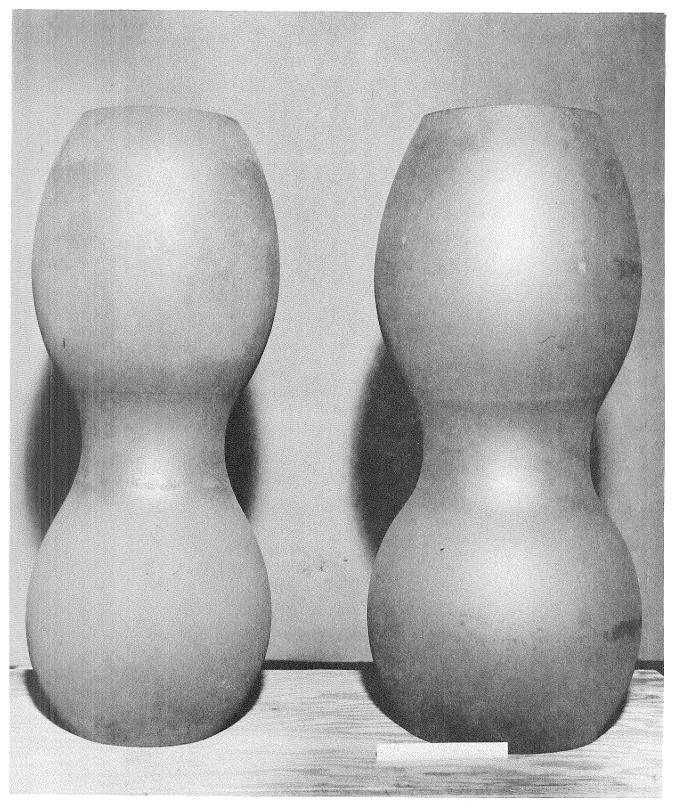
STAINLESS STEEL TUBES AFTER THREE FORMING CYCLES
